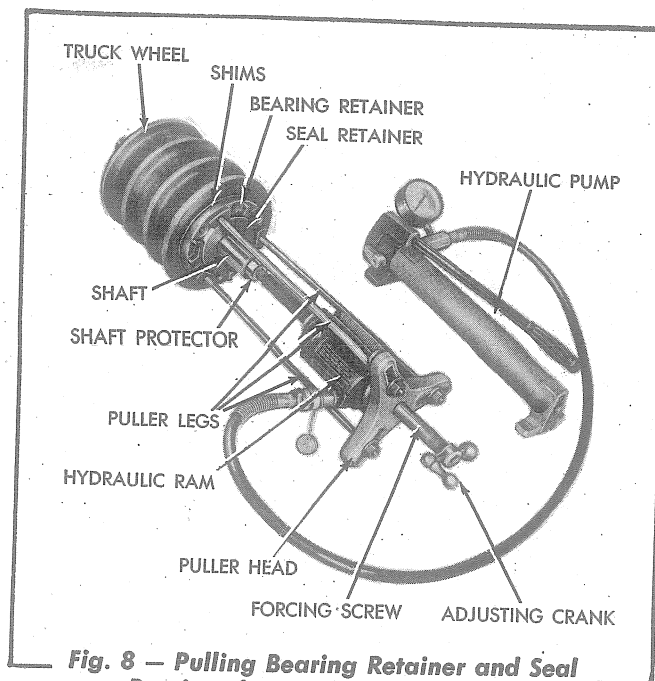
Pulling Bearing Retainer and Seal Retainer from Truck Wheel Shaft
